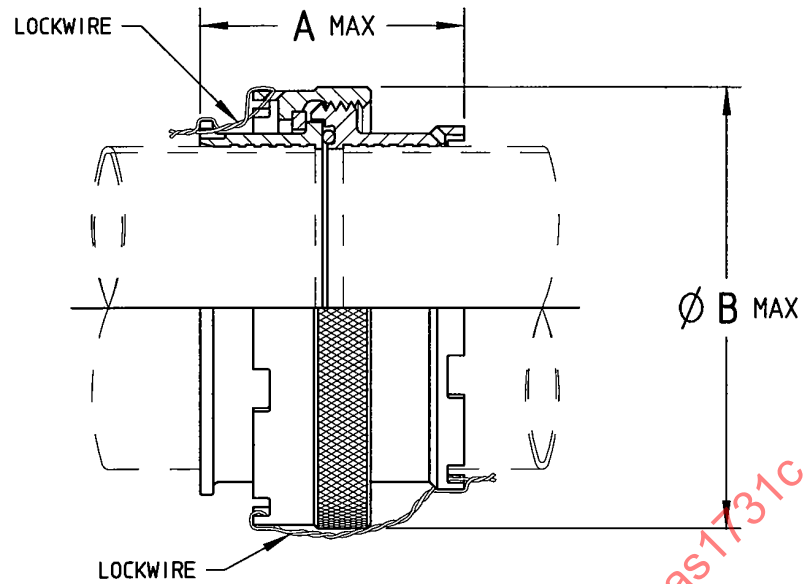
TYPE II COUPLING - ASSEMBLED VIEW
